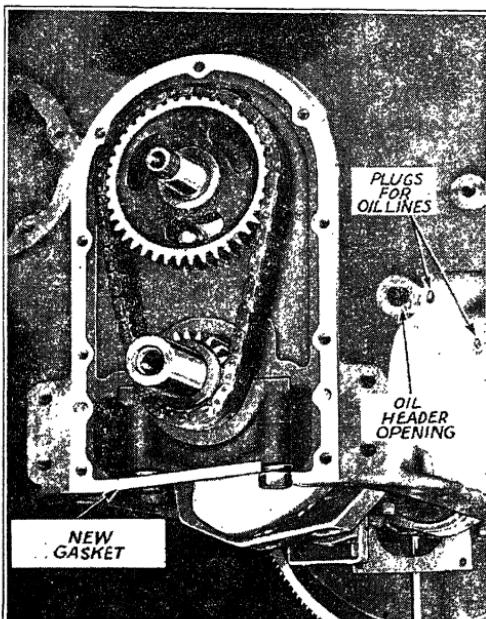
Front View of Eight-Cylinder V-type Motor Timing Chain
